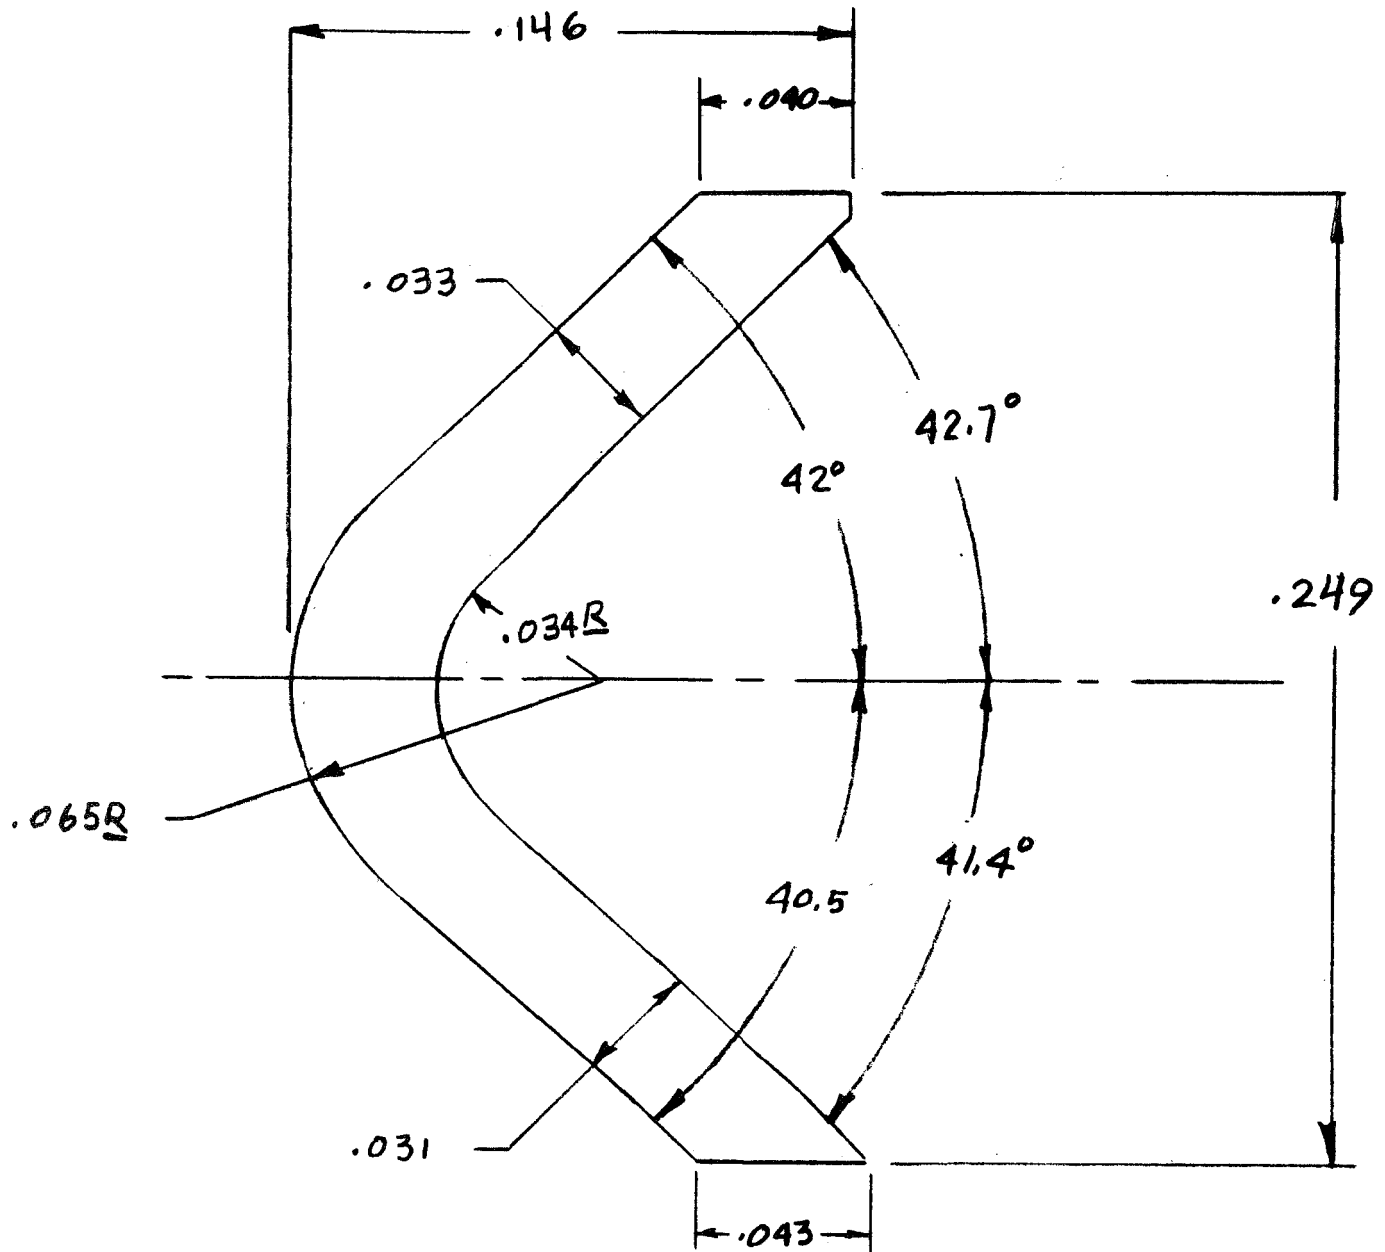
45° V-Seal - Dimensions After 1300-Hour Endurance Test
